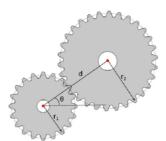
Gear system with the actuators shaft on the small gear and the micrometre shaft on the big gear for the implementation of a more stable linear stage.
